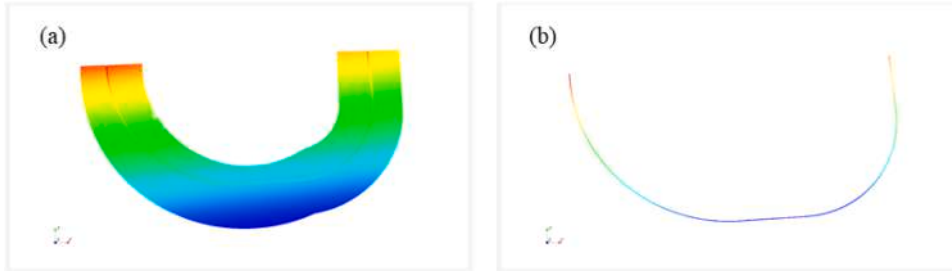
Experimental workpiece point cloud construction and weld path extraction (a) Point cloud of workpiece (b) Extracted weld seam path.
